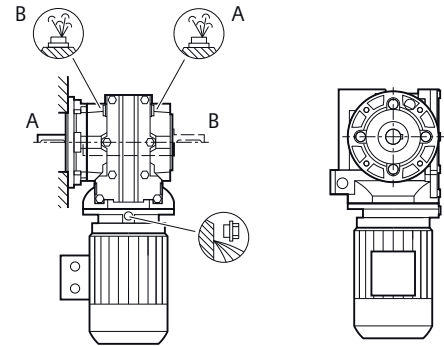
Mounting positions for helical worm gearbox CAD shaft-mounted design, sizes 39 - 89
